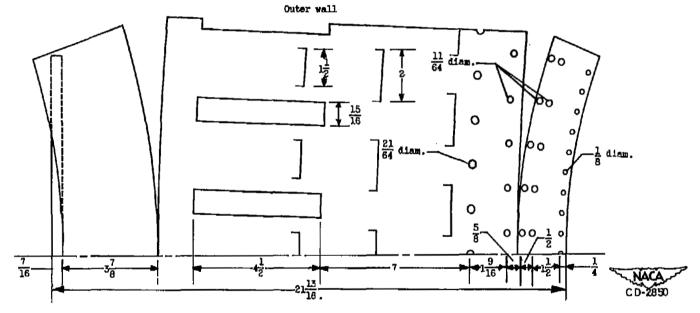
Liner air-entry holes of model 13 combustor. (Dimensions are in inches.)
